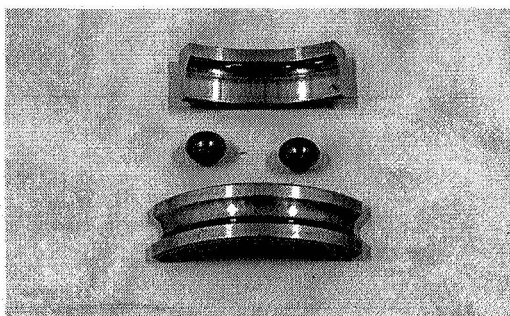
Shuttle Body Flap Actuator bearings with Blacken Balls
